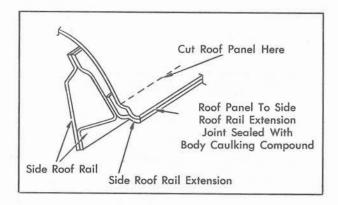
Removal of Roof Panel and Side Roof Rail Extension
